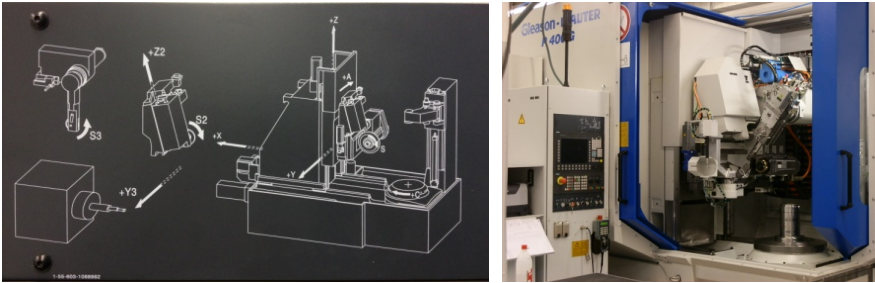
a) Axis of the machine, b) P400G Gear grinding machine
